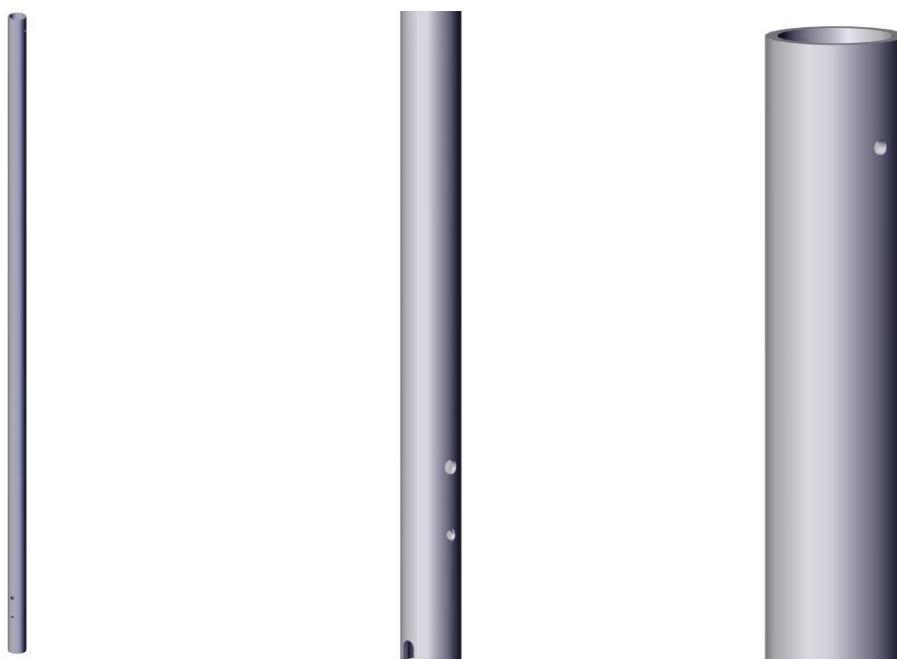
Mast tube with pre-drilled holes in its lower section and prepared for a set screw at the top.
